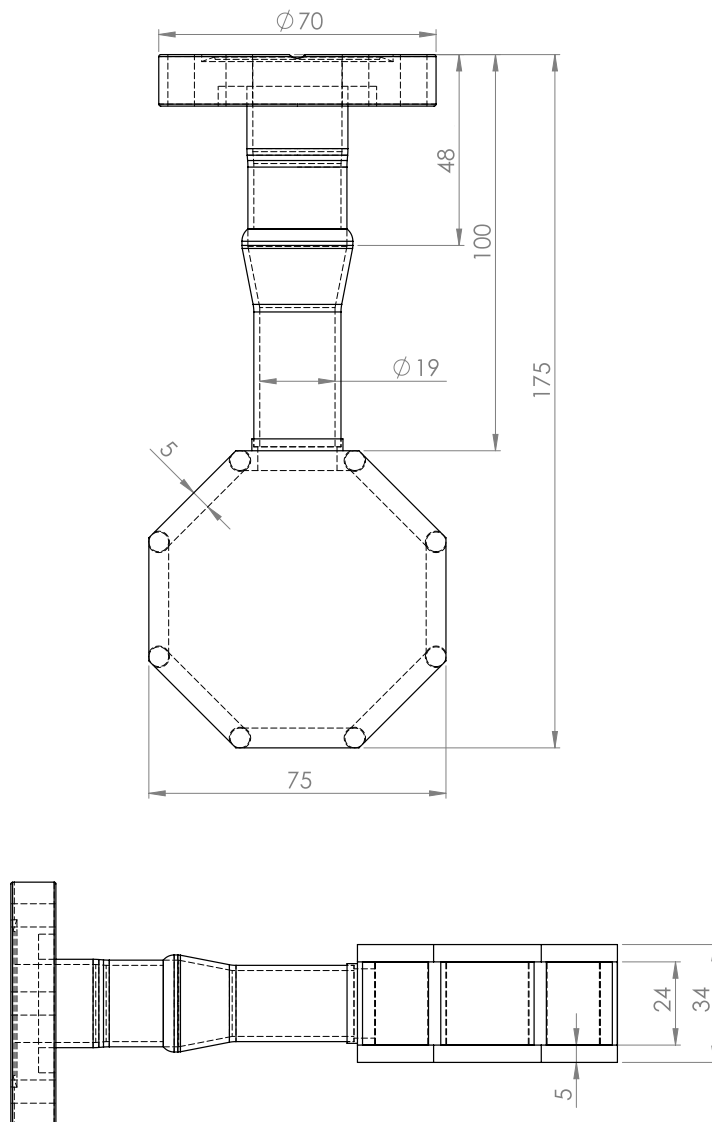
Technical drawing of the glass cell science chamber. Dimensions are given in millimeter.
